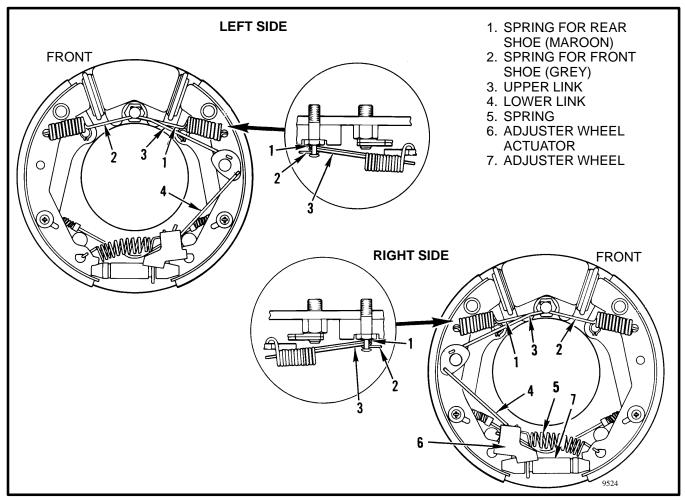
INSTALLATION OF THE SPRINGS, E/J2.00–3.00XL (E/J40–60XL)
